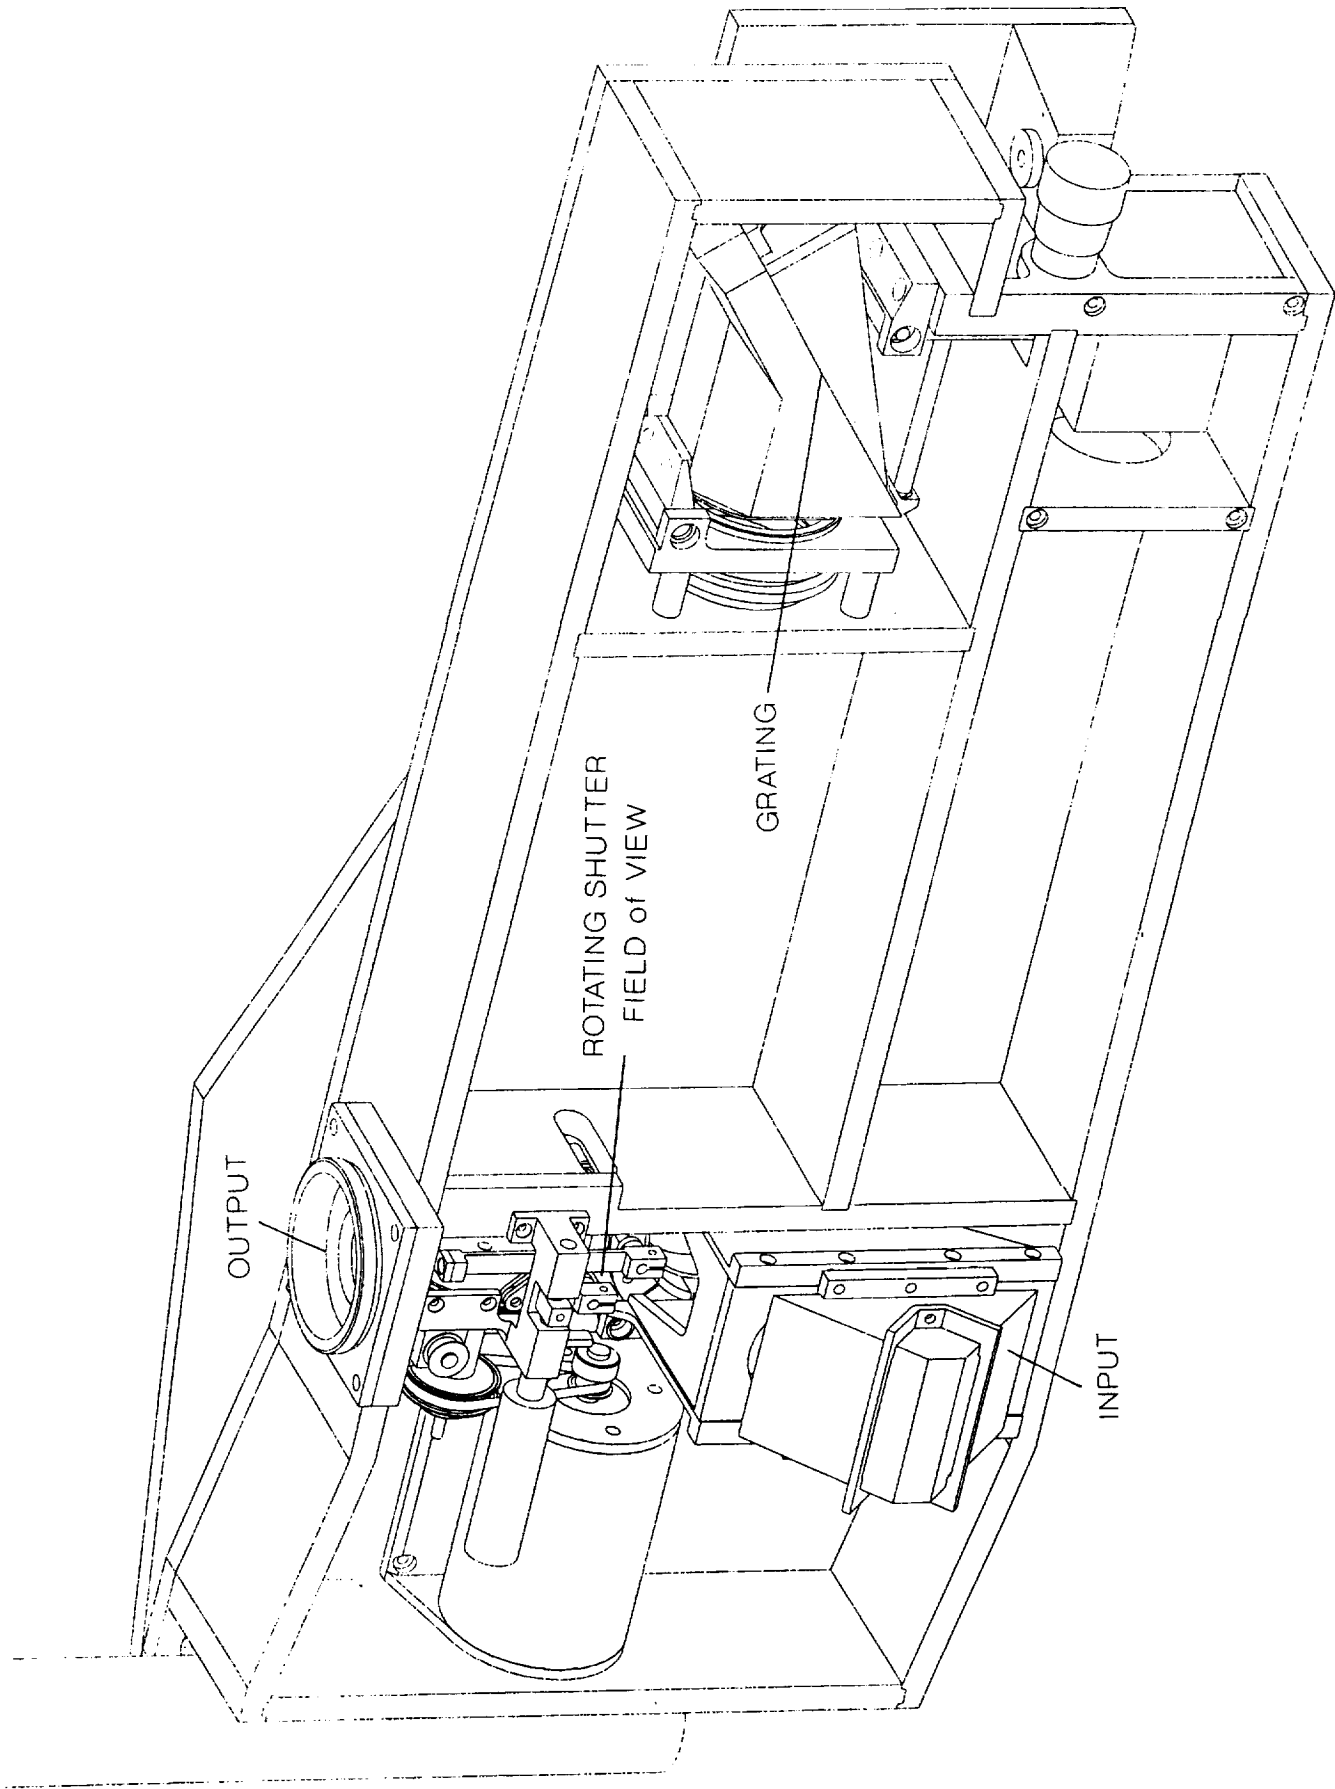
Mechanical Layout of the MTLRS#1 Receiver Package
